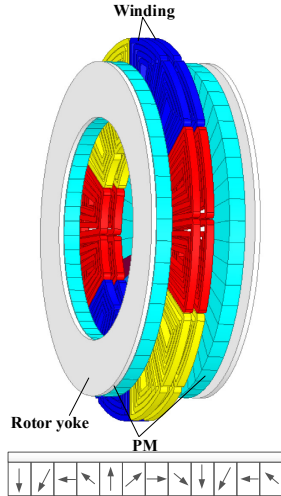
Three-dimensional model of the proposed 250kW machine.
